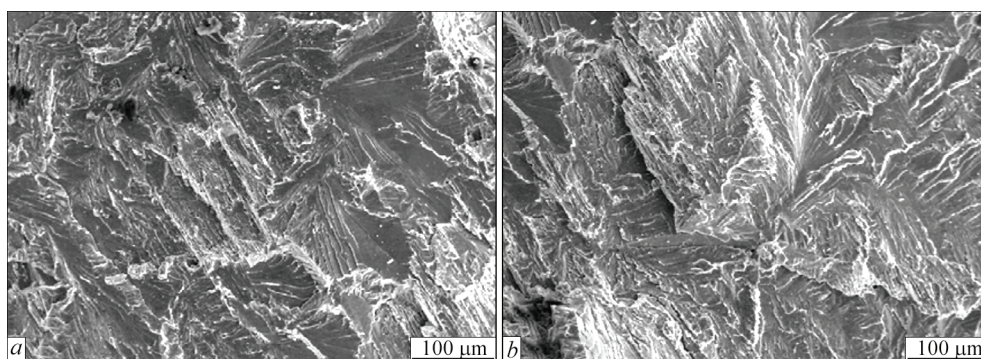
Fractogram of fracture surface of weld of a sample of 3 mm thick Ti-44Al-5Nb-3Cr-1.5Zr, at.% intermetallic alloy: *a* — weld structure (face side), $\times 200$; *b* — fracture area with elongated lamellas on the reverse side, $\times 200$
